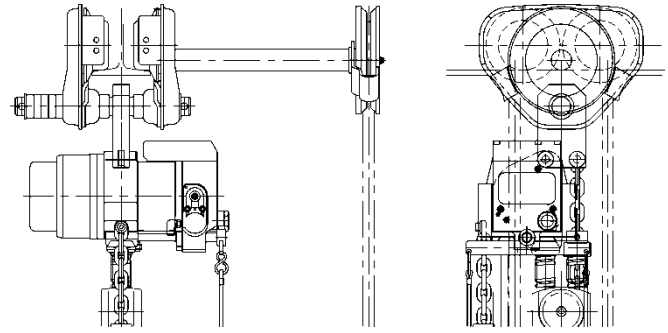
Lug mount on Geared TS2 Extended Hand Wheel
